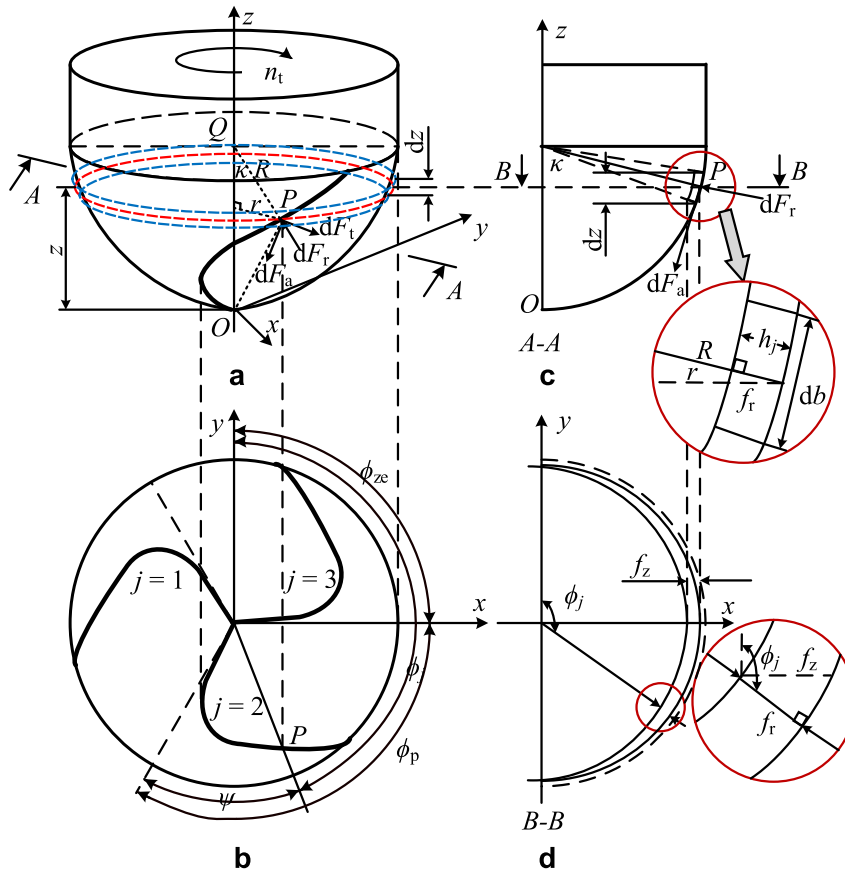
Schematic diagram of a 3-flute ball nose milling cutter. (a) Flutes in front view (b) and top view. (c) Elemental chip in front view (d) and top view.
